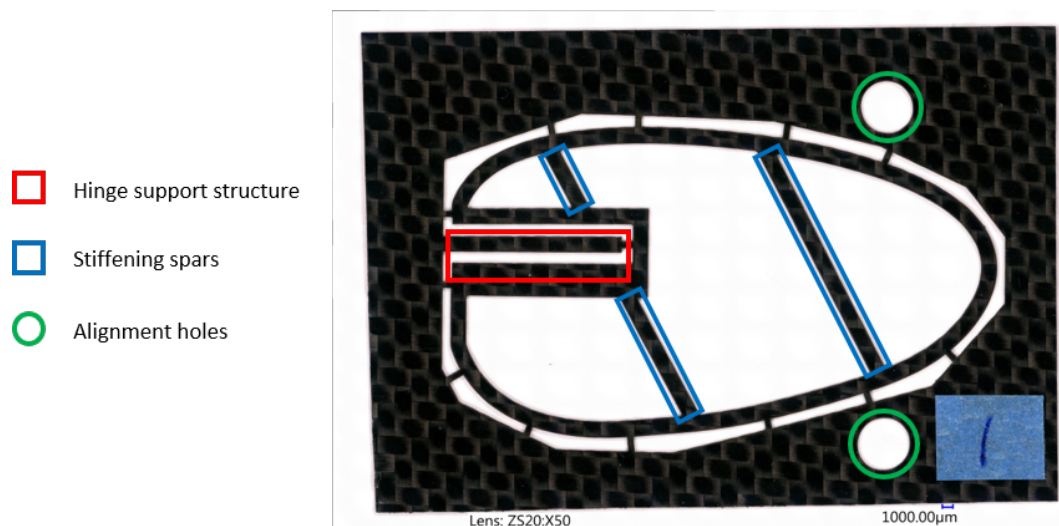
Carbon wing sheet with the hinge support structure, stiffening spars and alignment holes indicated in red, blue and green respectively. Note that this wing sheet is not the final wing design. For the actual final design, the hinge was moved a bit further into the wing (see fig. 5-2).
